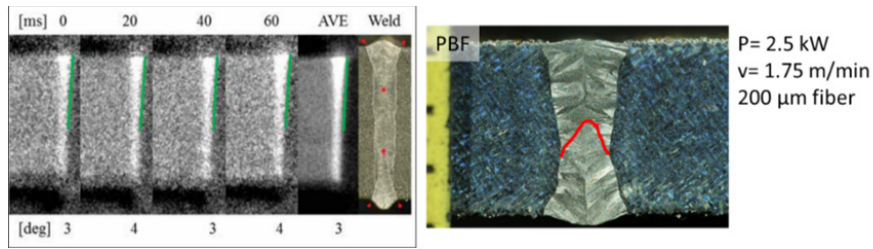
Left: kaleidoscope keyhole mode and “twin top” weld geometry (Vänskä 2014). Right: one of twin top welds acquired during the welding tests. Red line describes the shape of the weld from the root side.
